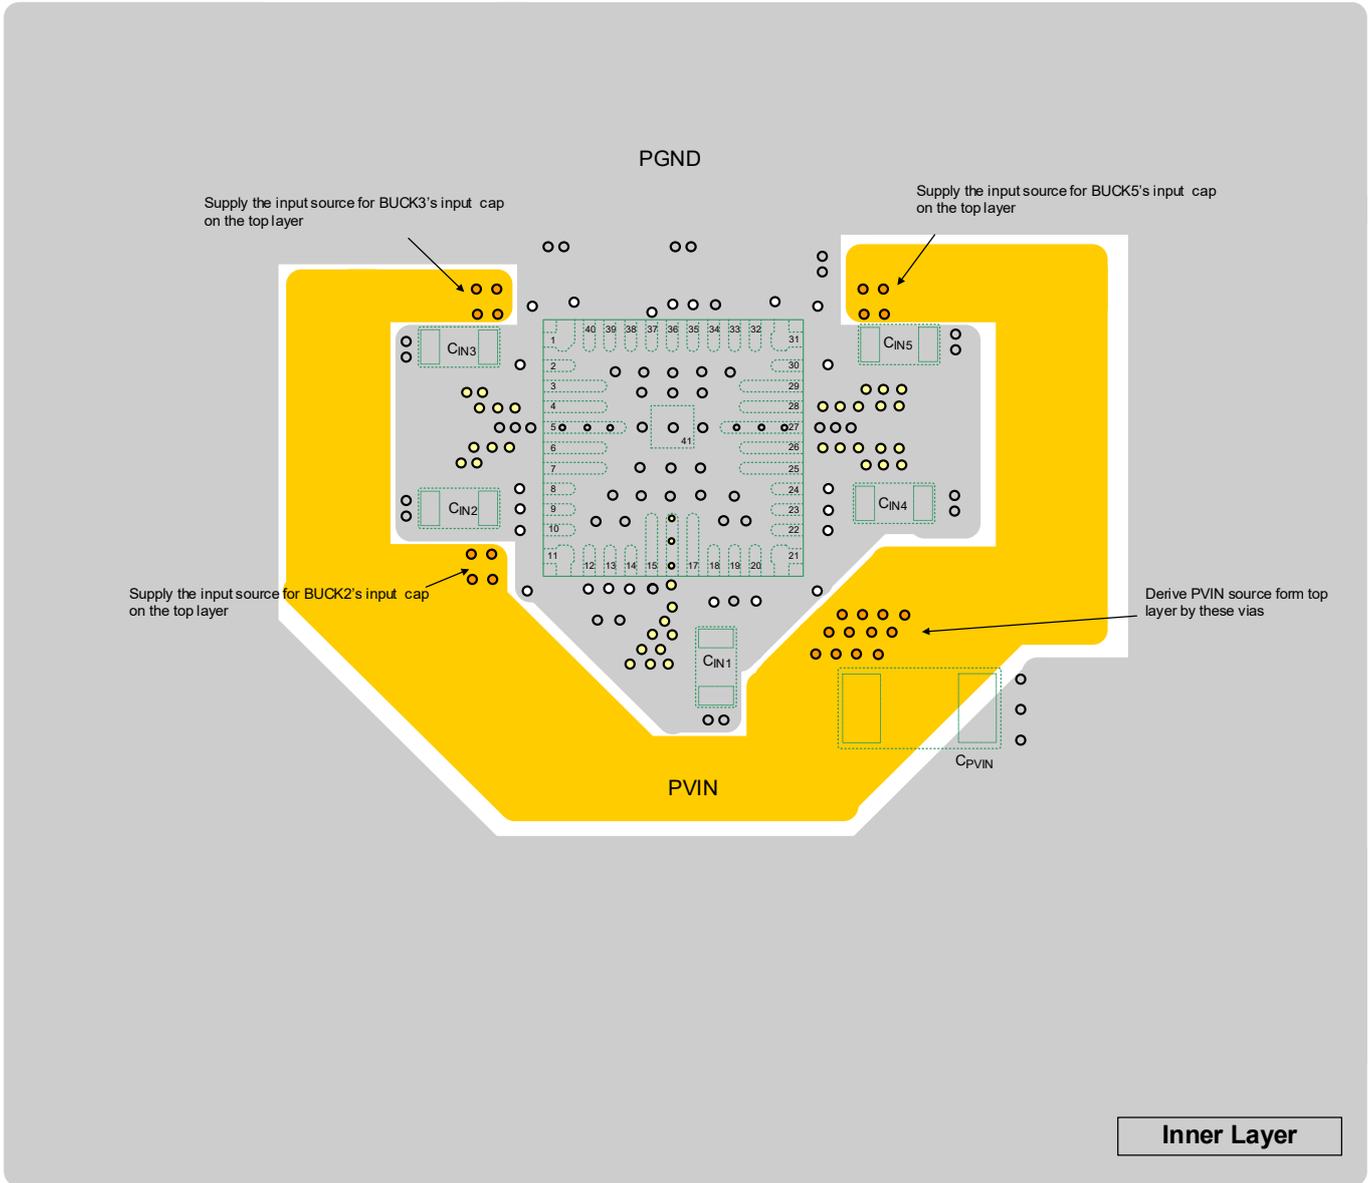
PCB Layout Reference of Option 2 (Inner Layer, top view)
